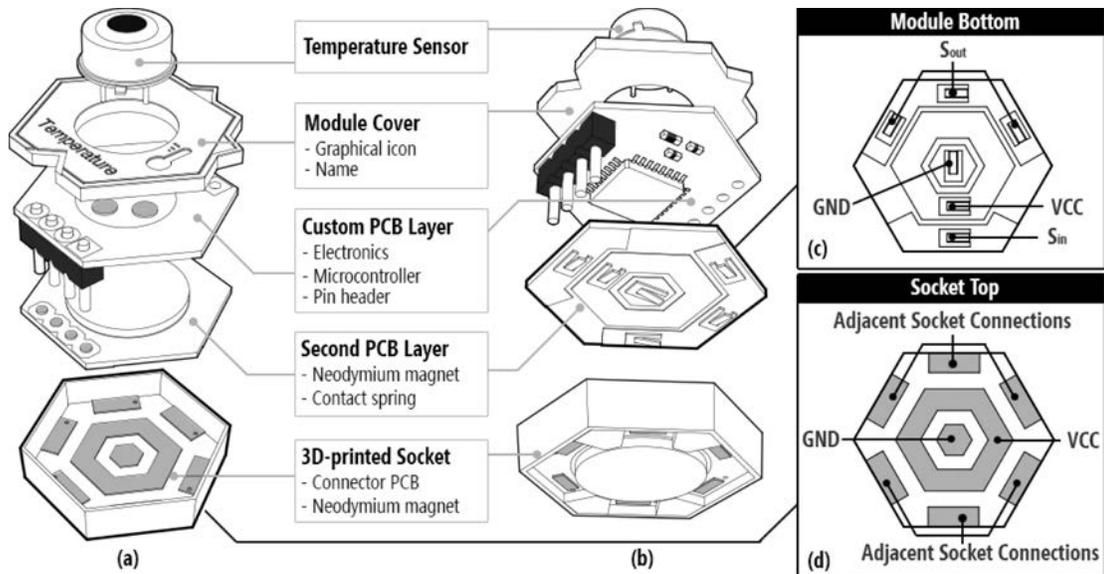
An exploded (a) top-down and (b) bottom-up view of an example MakerWear module and socket as well as overhead views of (c) module and (d) socket connector points. The contact springs ensure a robust connection.
